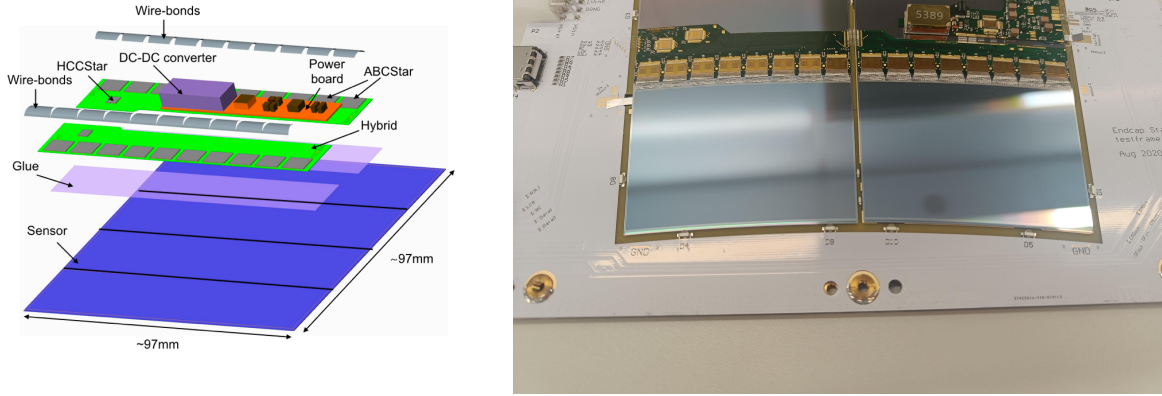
Schematic view of ITk strip module parts (left) [58], and a photo of an ITk strip endcap R4 module assembled at DESY. The module is placed on a test frame, used for testing it electrically.
